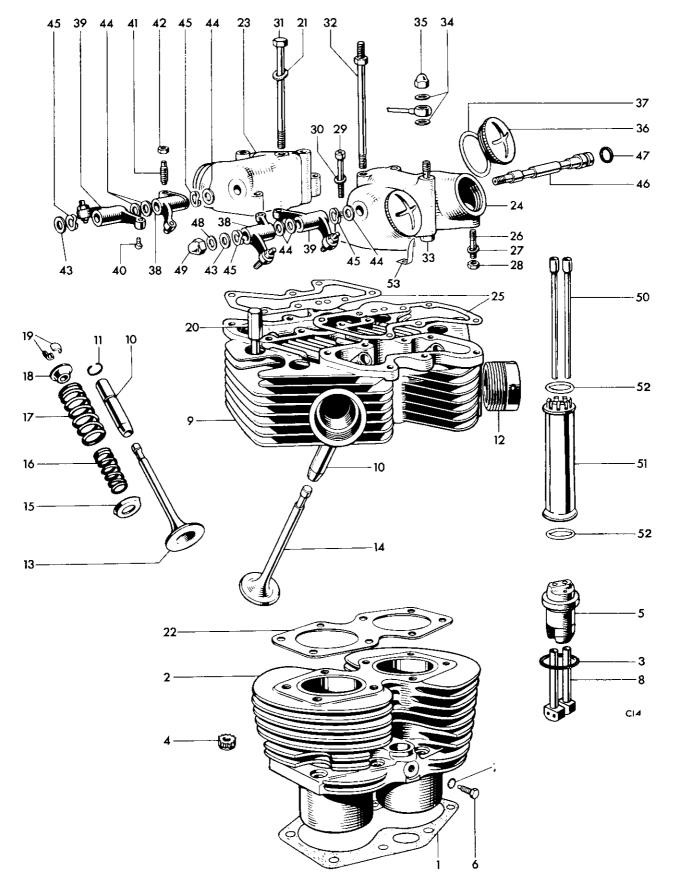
CYLINDER BLOCK AND HEAD, T100S AND T100C
